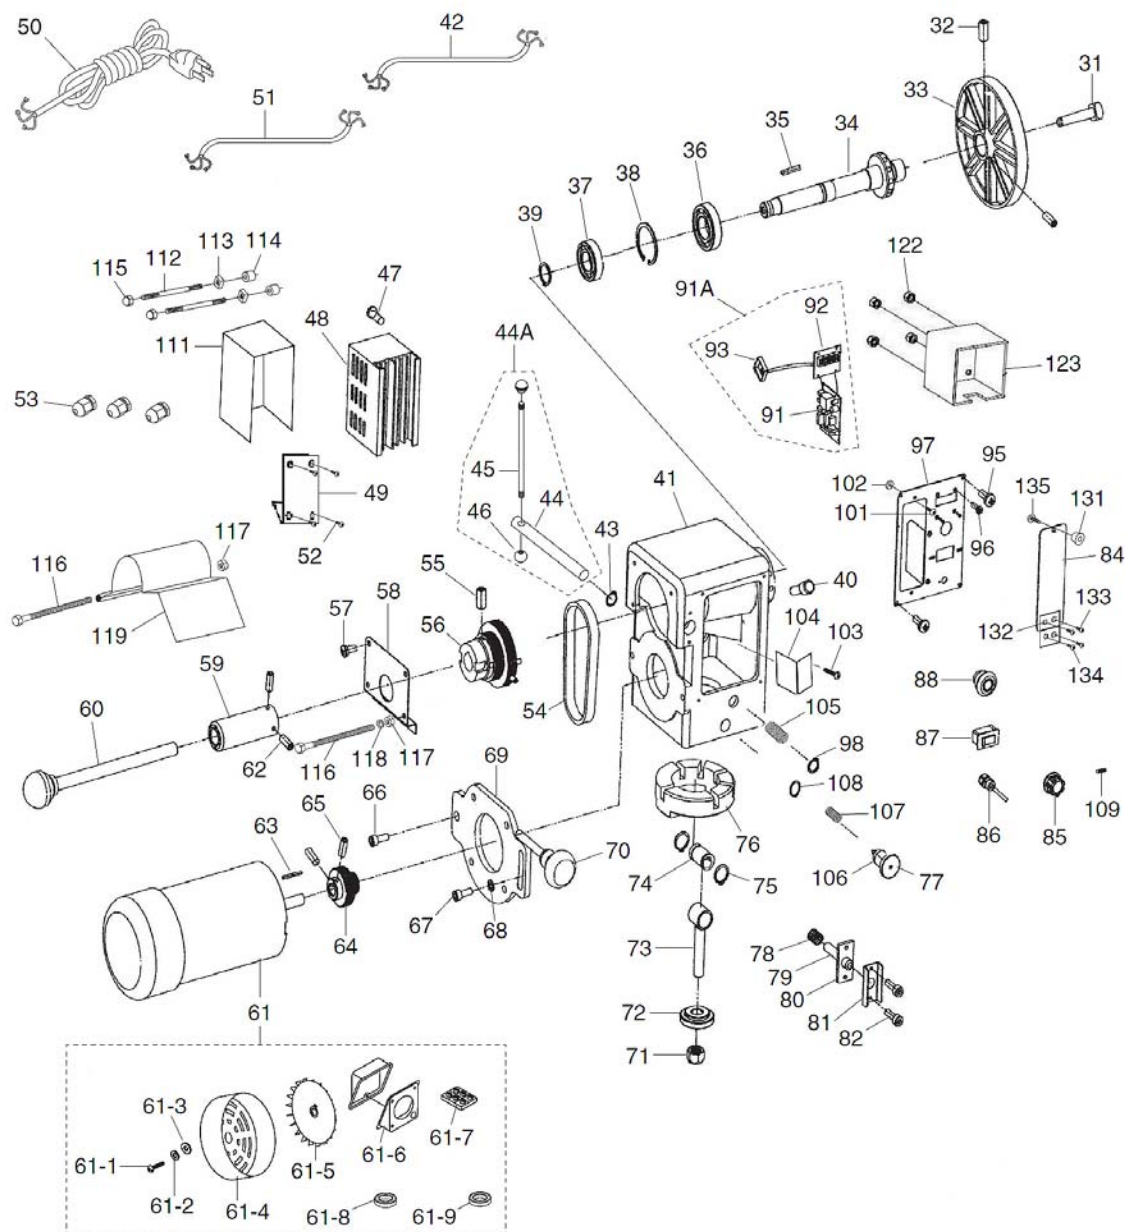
Spare parts drawing 2 Wood Lathe DB 1102 VARIO
